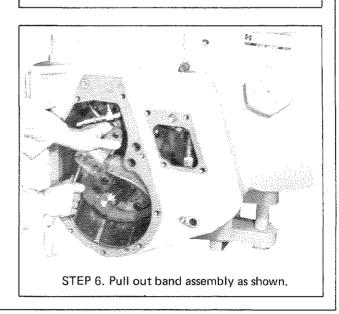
REMOVAL OF HYDRAULIC BRAKE ASSEMBLY, POWER CONTROLLED WINCH (Sheet 1 of 2)
